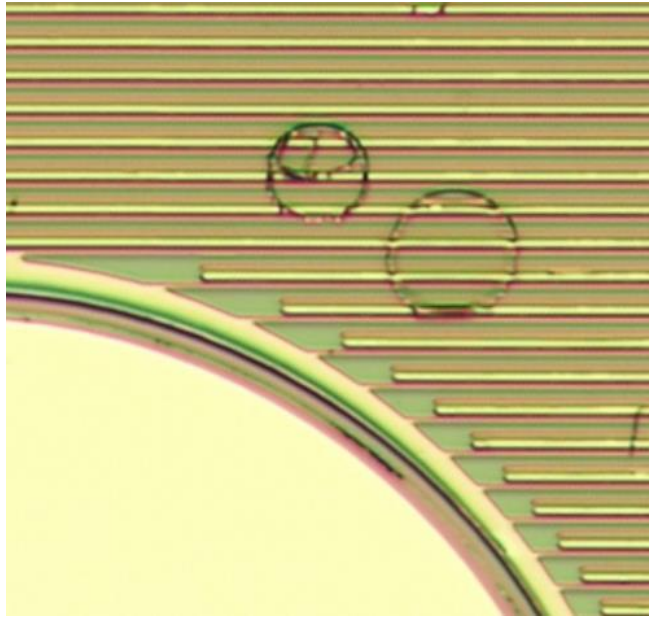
OmniCoat surface defects potentially causing fractures in top electrode pattern.
